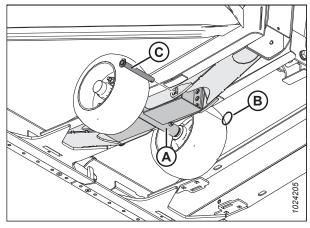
Inboard Wheel Assembly and Left Header Leg – View from Below, Right Opposite
